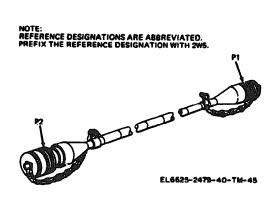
Cable Assembly, Power, Electrical CX-13714/AYM-8, parts location.
